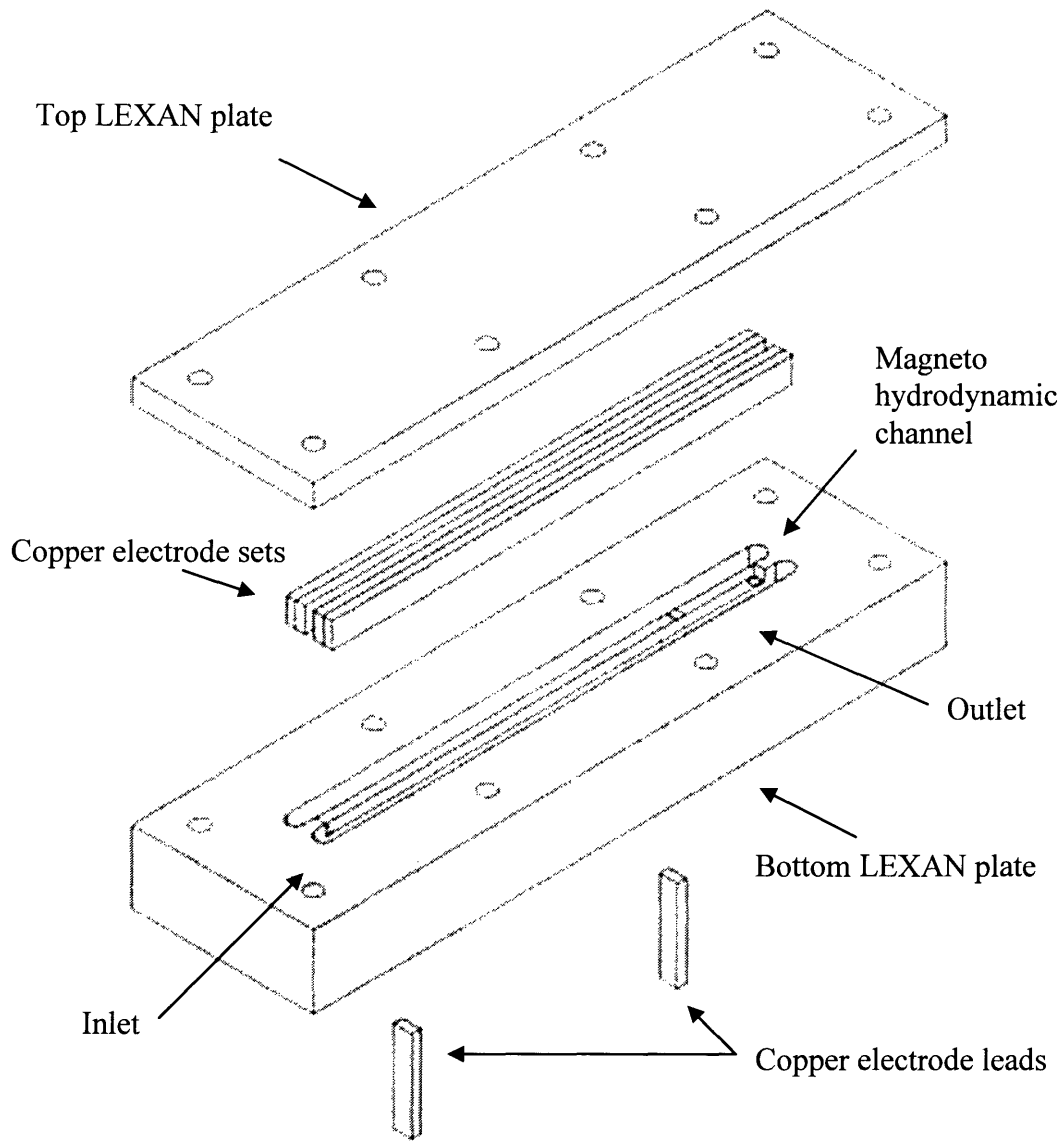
Exploded view of the first generation magneto hydrodynamic channel.
